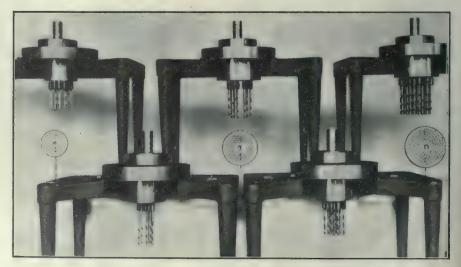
Interchangeable Drilling Heads, Multiple Drilling Machine.
